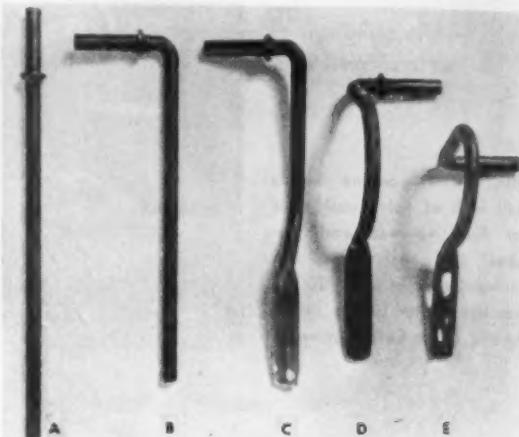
Tractor hood hinge after various processing stages: (A) heading flange, (B) 90° bend, (C) offset and flattening, (D) first arching and (E) after final arching, piercing and drilling.
